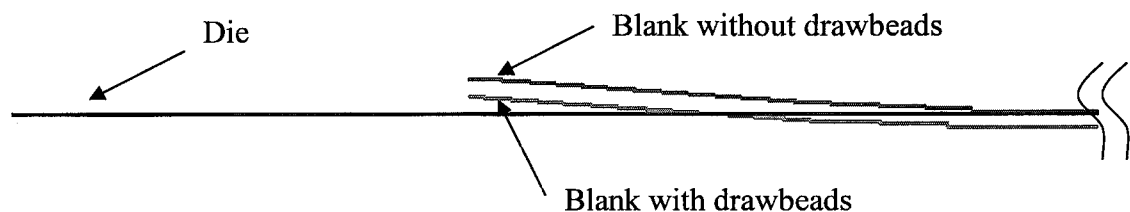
Springback Behaviour in the Flange Shape Along the Cross-section A-A'
